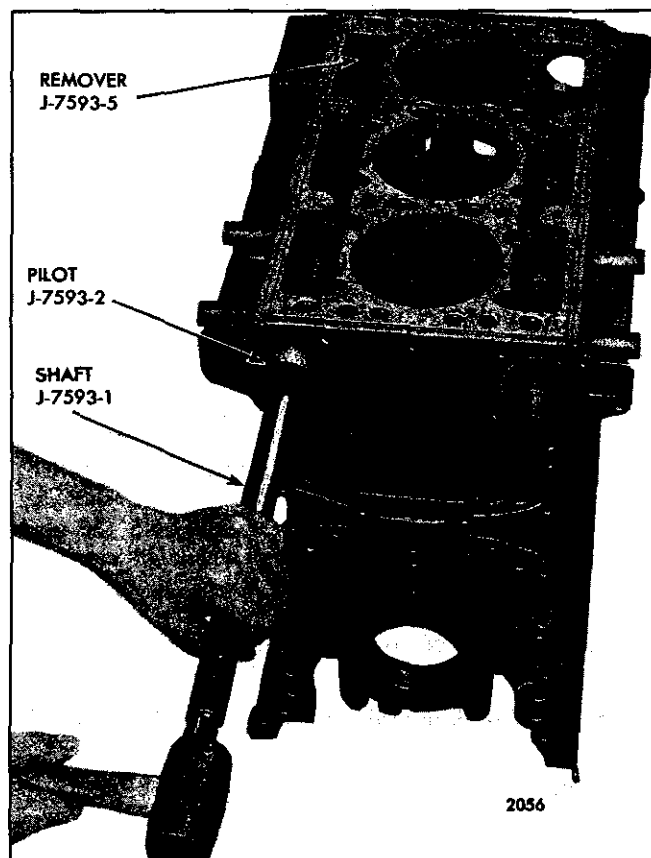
Removing End Bearing with Tools J 7593-1, J 7593-2 and J 7593-5
